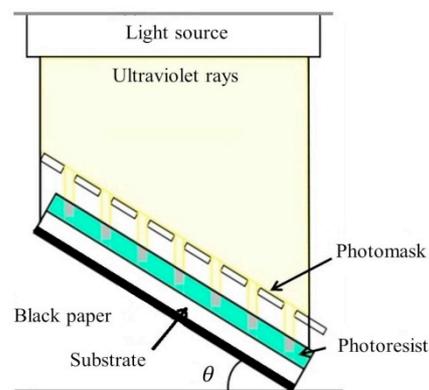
Schematic of inclined exposure for the fabrication process of soluble mold.
